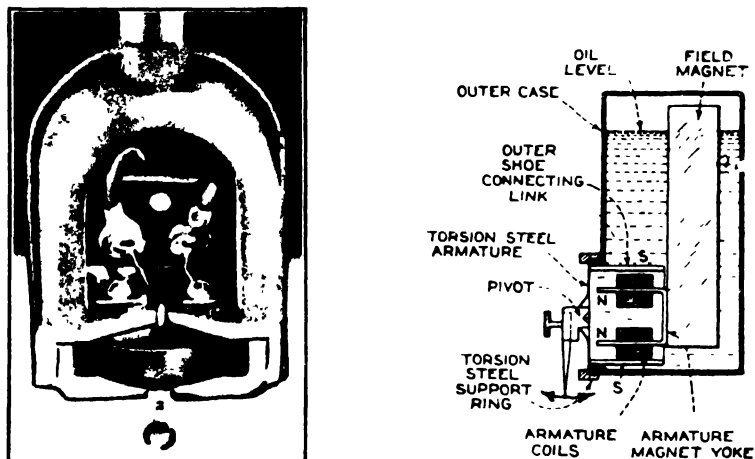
Left Interior view of rubber-damped magnetic pick-up unit with cover removed. The horseshoe magnet, pole pieces, armature, and coil are plainly visible. Right Cross-sectional view of a typical oil-damped pick up, showing the relative arrangement of the parts.
